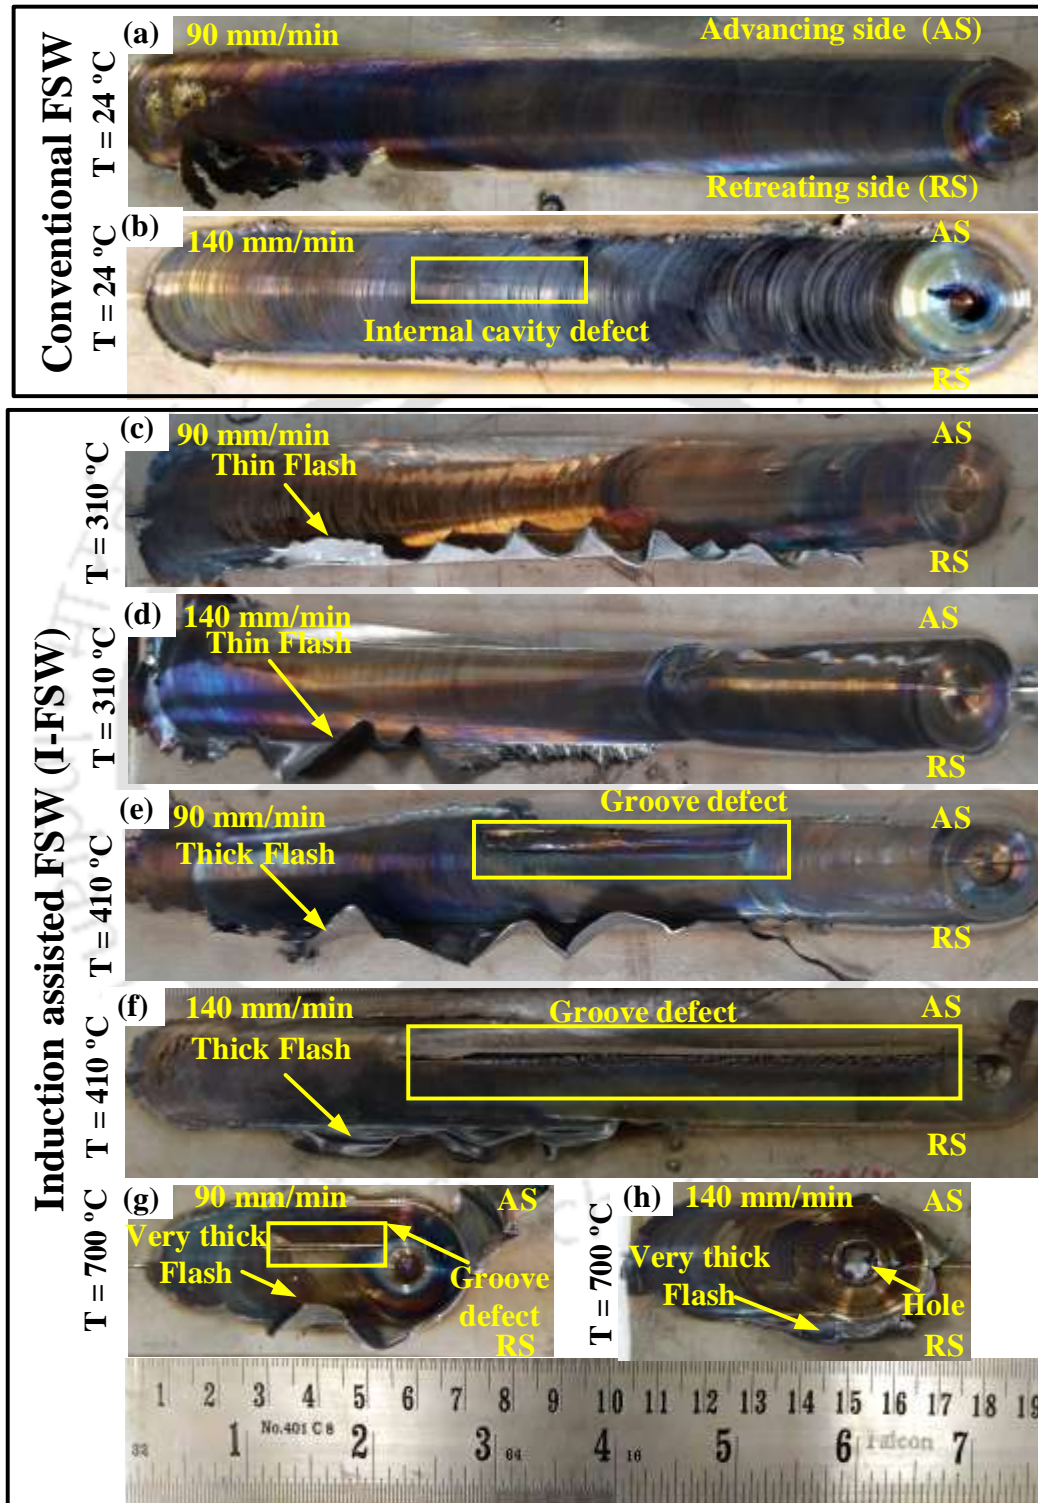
The top surface appearances of welded plates obtained during (a, b) conventional FSW and (c-h) I-FSW process.
